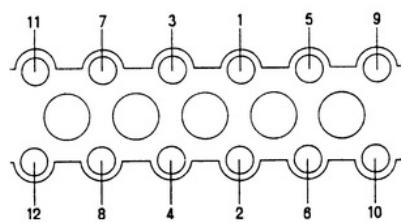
2.3L and 2.4L 5-cylinder engine head bolt tightening sequence
